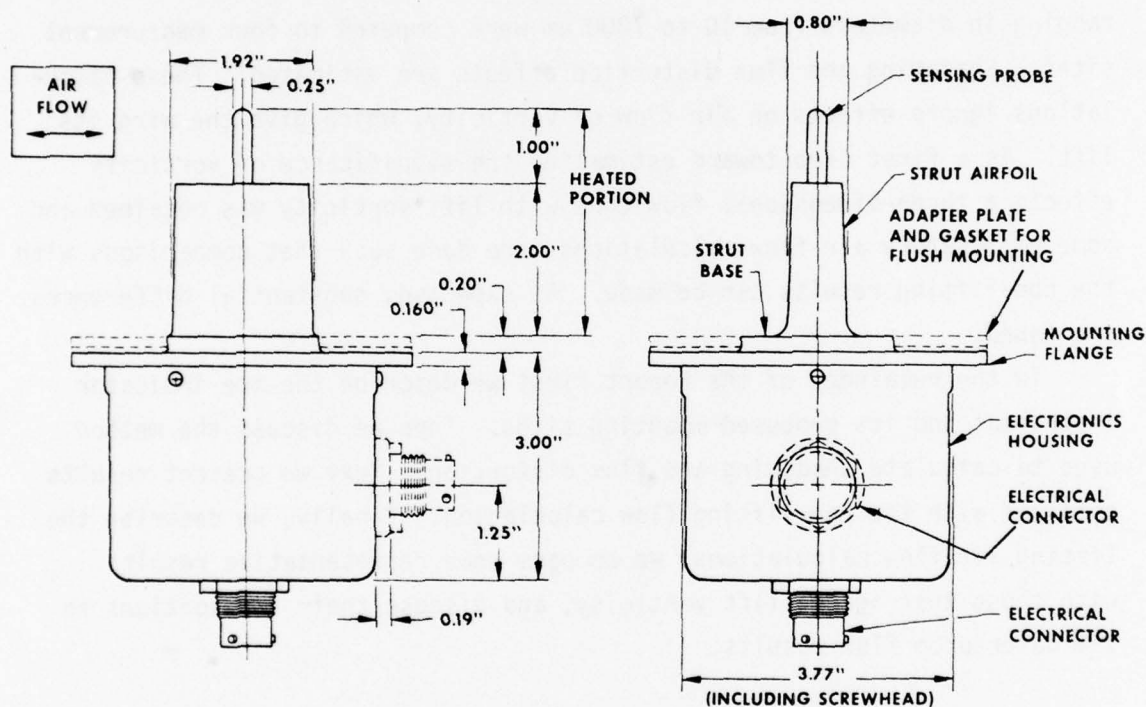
Dimensioned drawing of the Rosemount Model 871FA ice detector.
